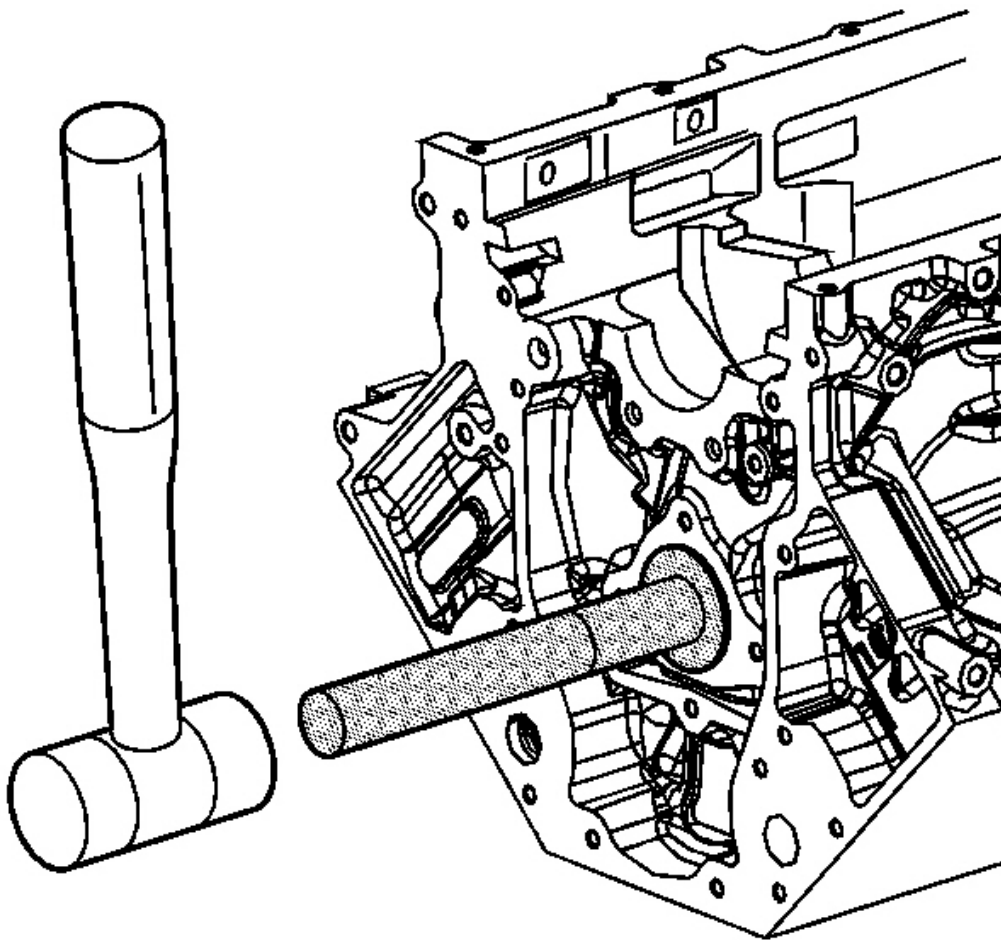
Driving Bearing Out Of Or Into Engine Block
